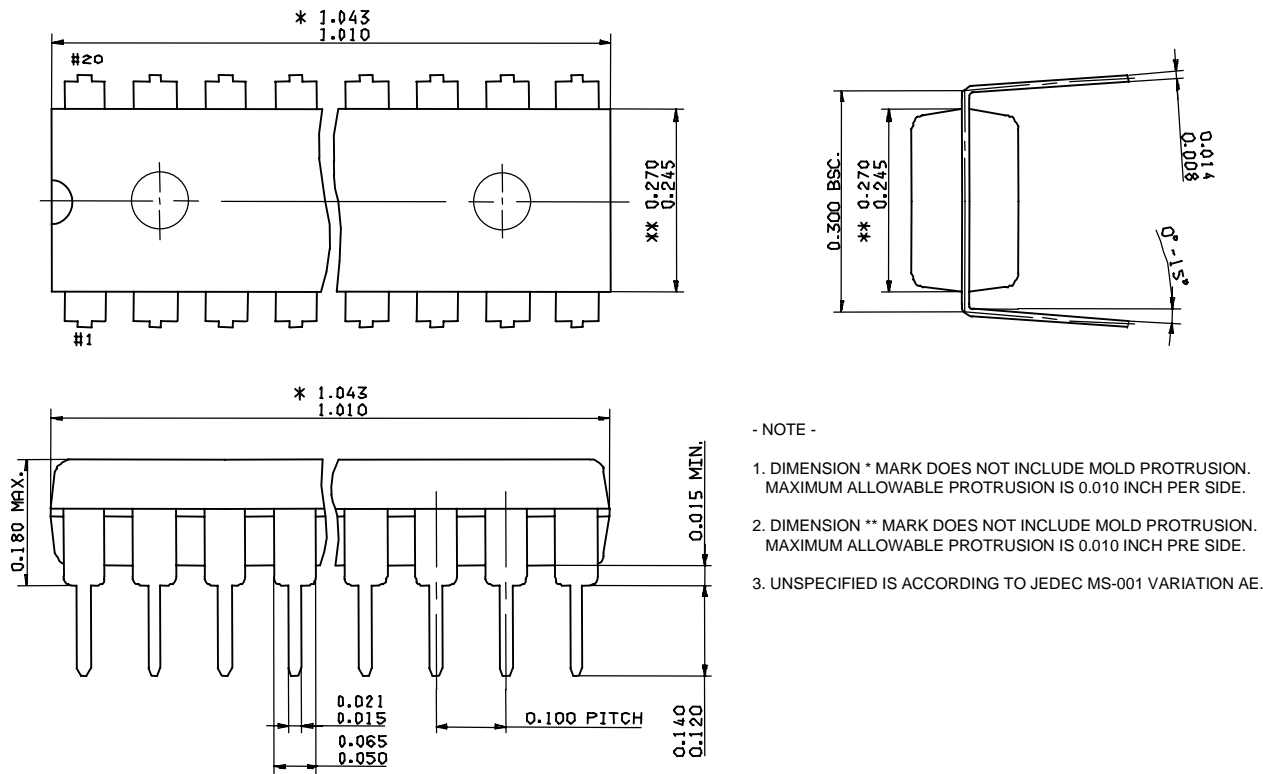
20PDIP (300MIL) Pin Dimension (UNIT : INCH)
